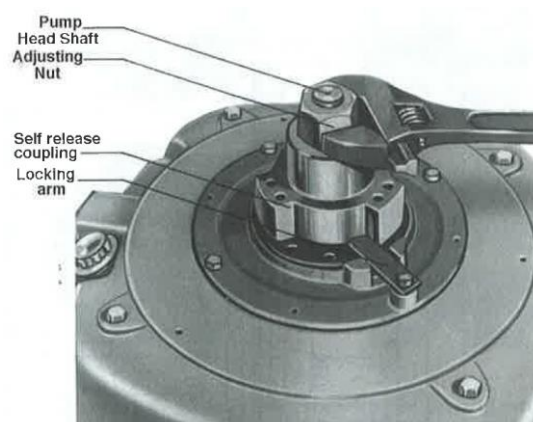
Hollow shaft through the motor (Bloch & Budris, 2010, p. 307)
